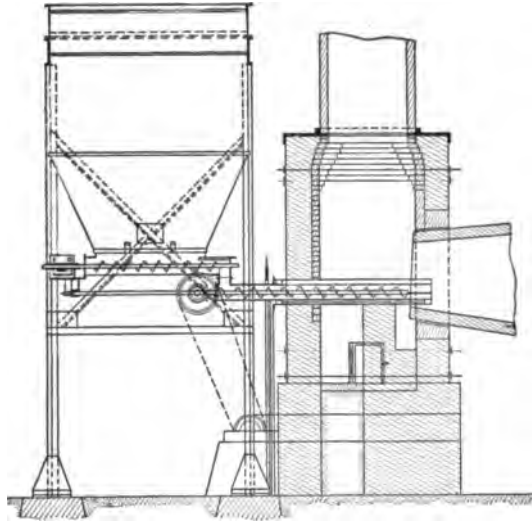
Kiln Feed by Jacketed Conveyor.
